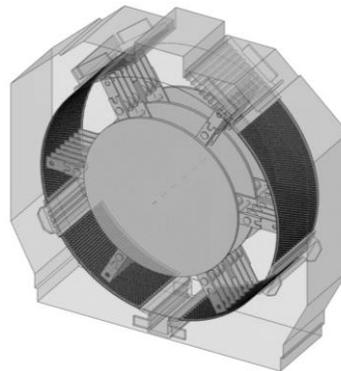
Design of the simulated hammer mill; (light grey) grinding chamber, (medium grey) rotor, (dark grey) sieve geometry
